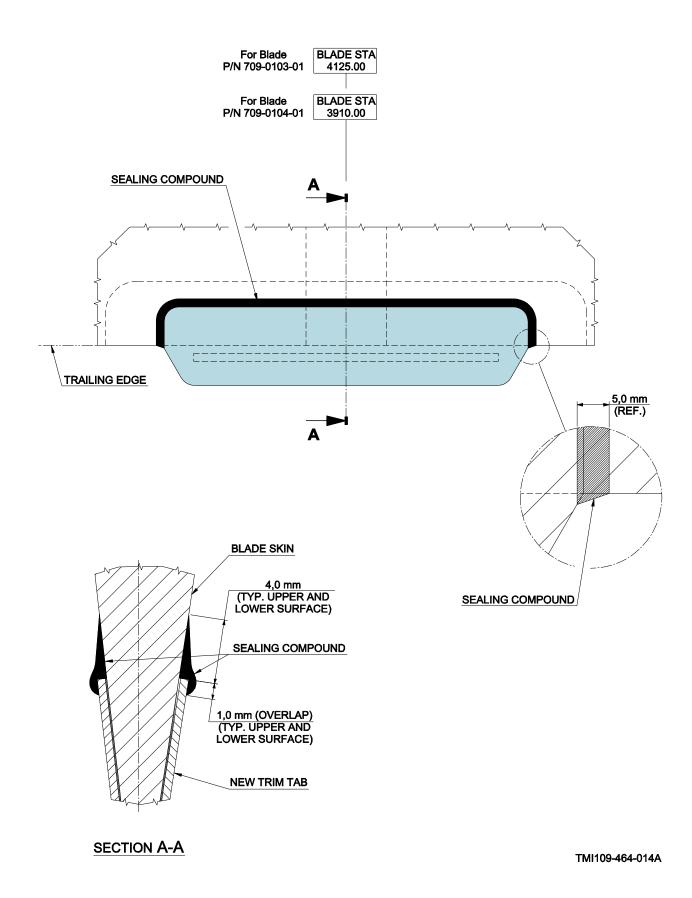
Main rotor blade - Replacement of the trim tab (sealing).
